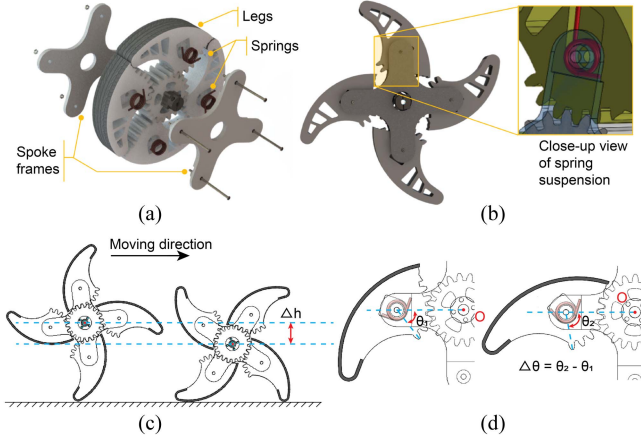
Advanced WheelLeR design with embedded torsional springs. (a) Exploded view of the CAD model. (b) Fully assembled view with a close-up view of the torsional spring housed in the leg. (c) Vertical height change while walking. (d) Winding angle in the torsional springs.
